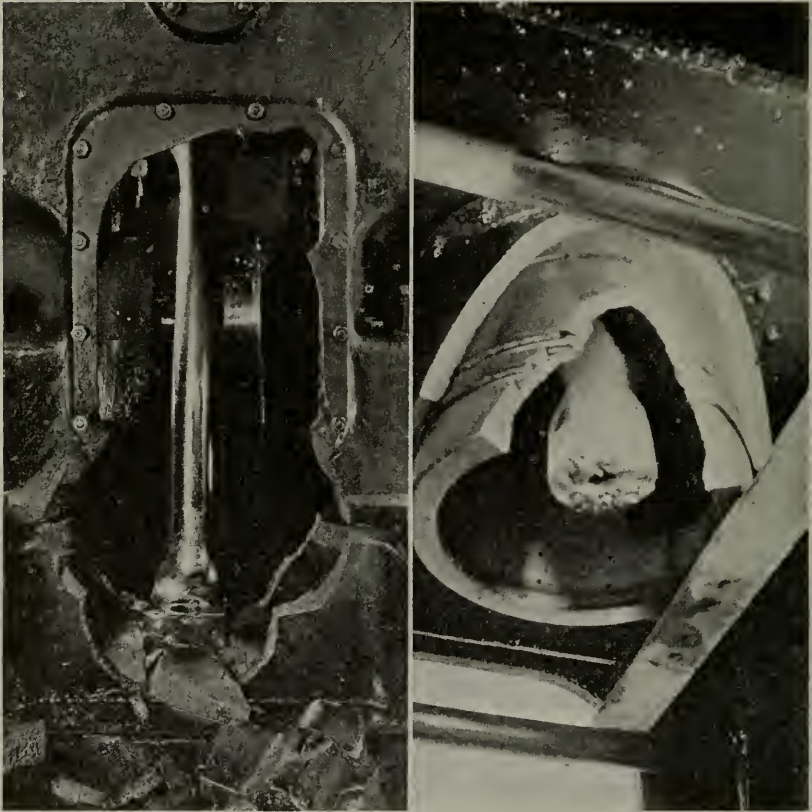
Left—Crankbolt breakage in a 260 hp Diesel engine. Figure 5—Right—Broken connecting rod and other damage on a 600 hp engine. This accident was caused by failure of a crankbolt, which had been in use for approximately 30,000 operating hours.
